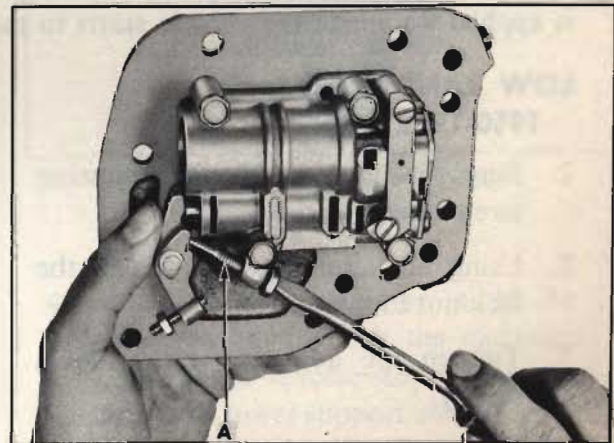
Setting (1) of throttle valve inner lever adjustment
